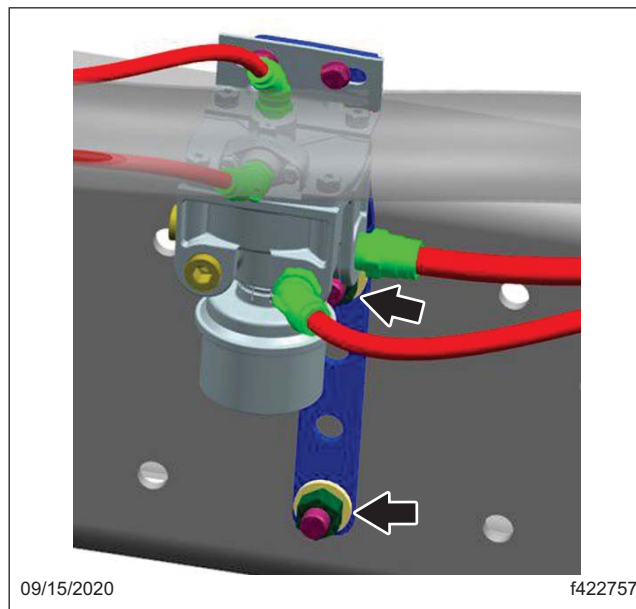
, Relay Assembly Attached with the Forward Fasteners
